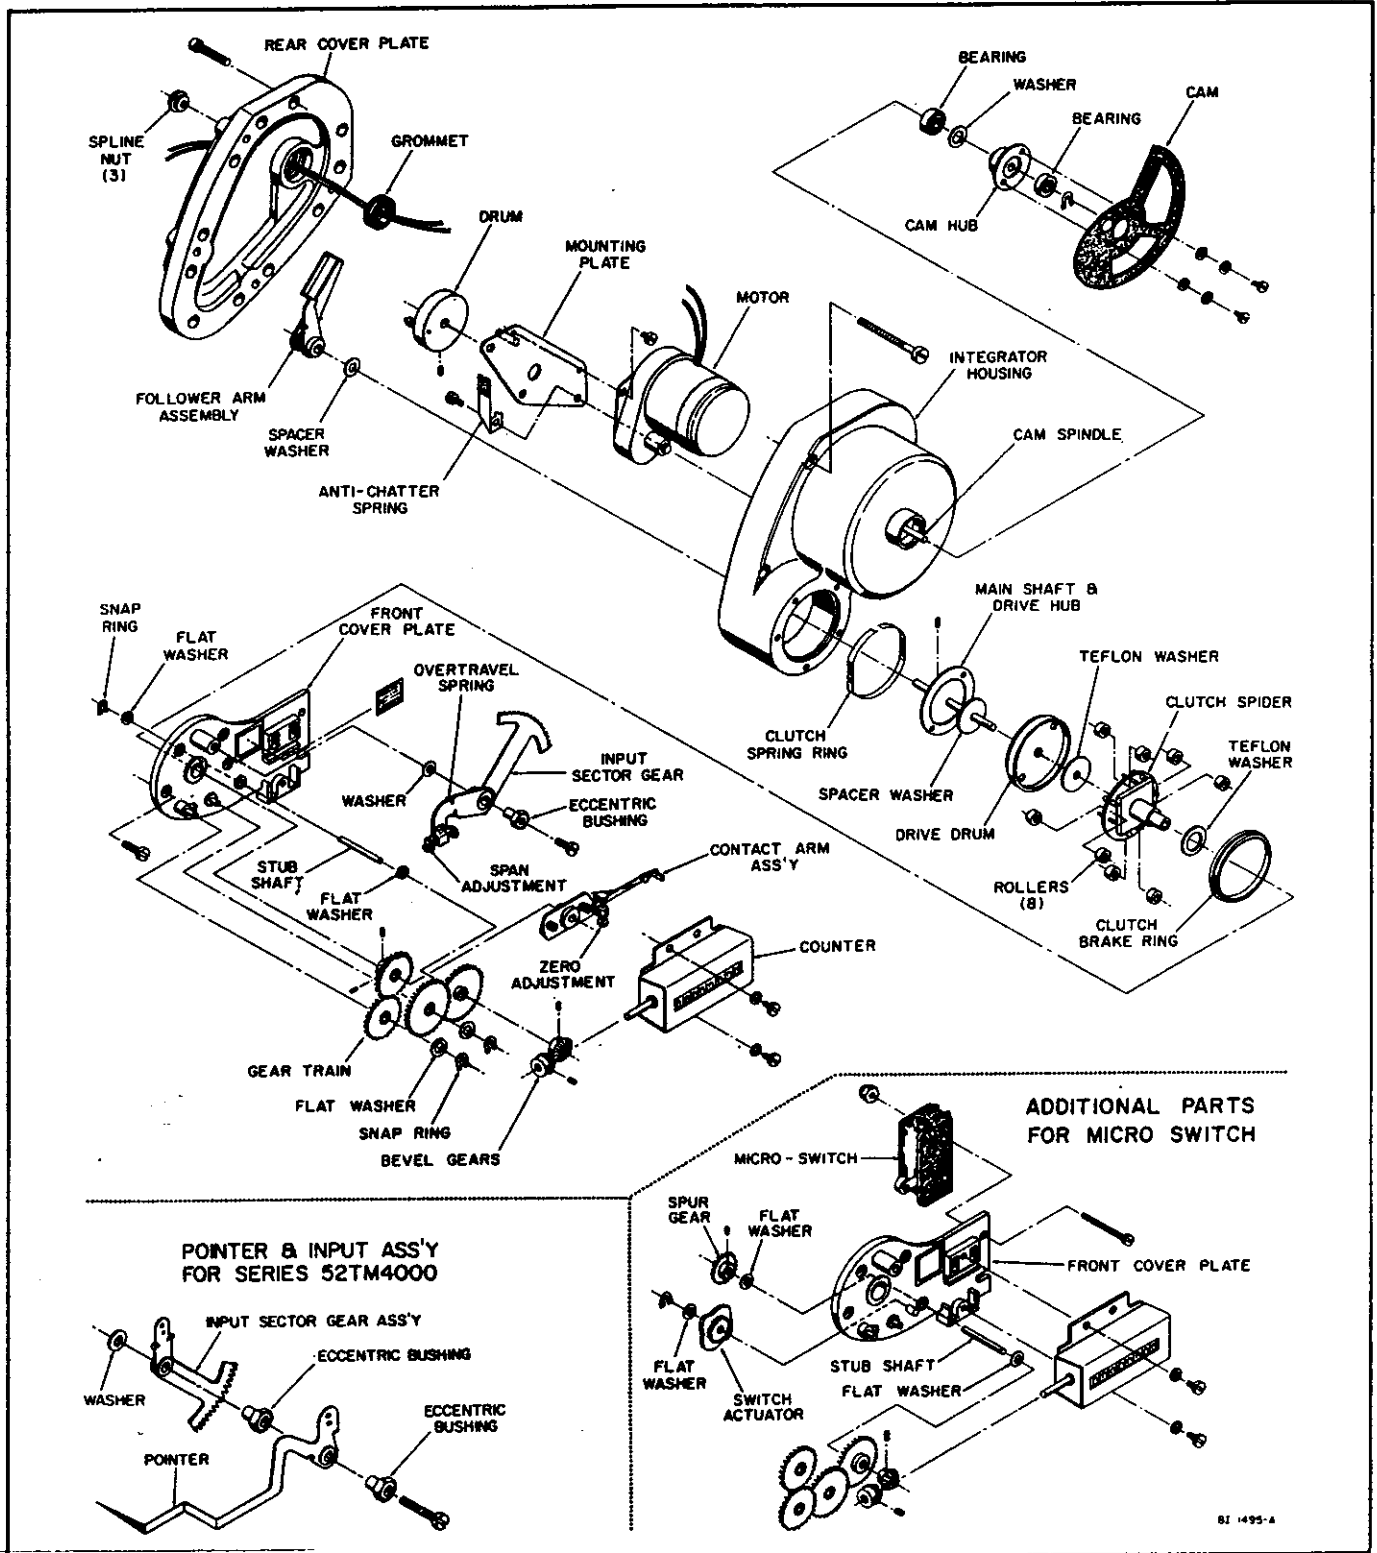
EXPLODED VIEW OF STANDARD ELECTRIC MOTOR OPERATED INTEGRATOR
